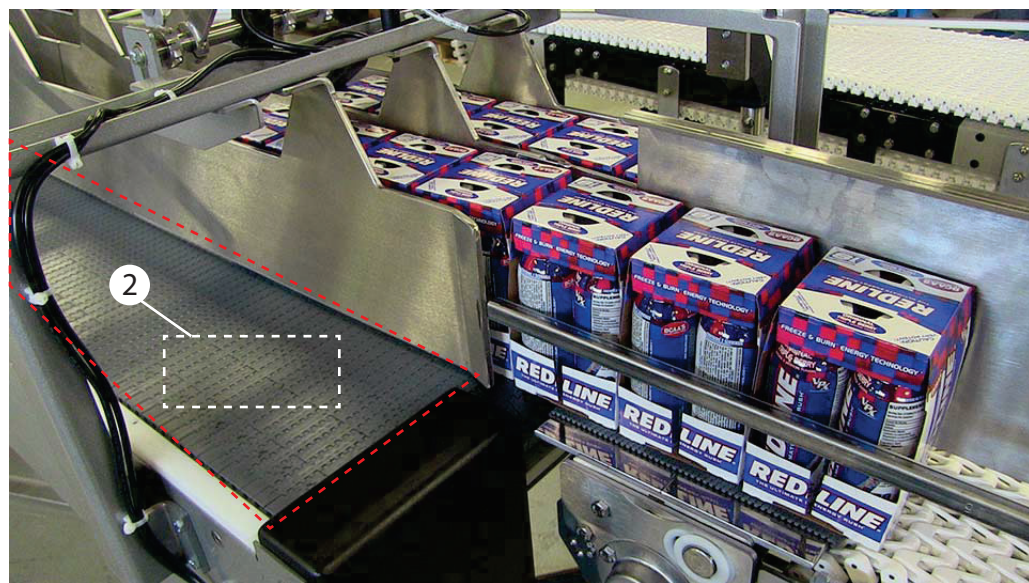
Inspect Table Top In-feed Conveyor Belt
